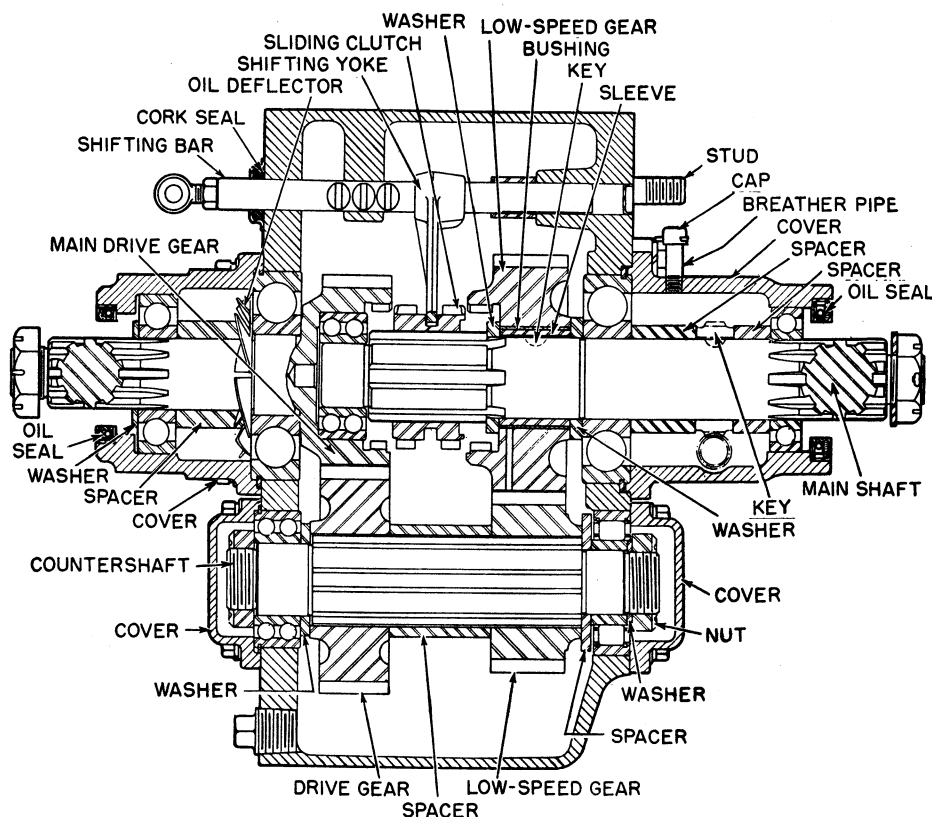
Fuller two speed auxiliary transmission. Model 2-A-45
